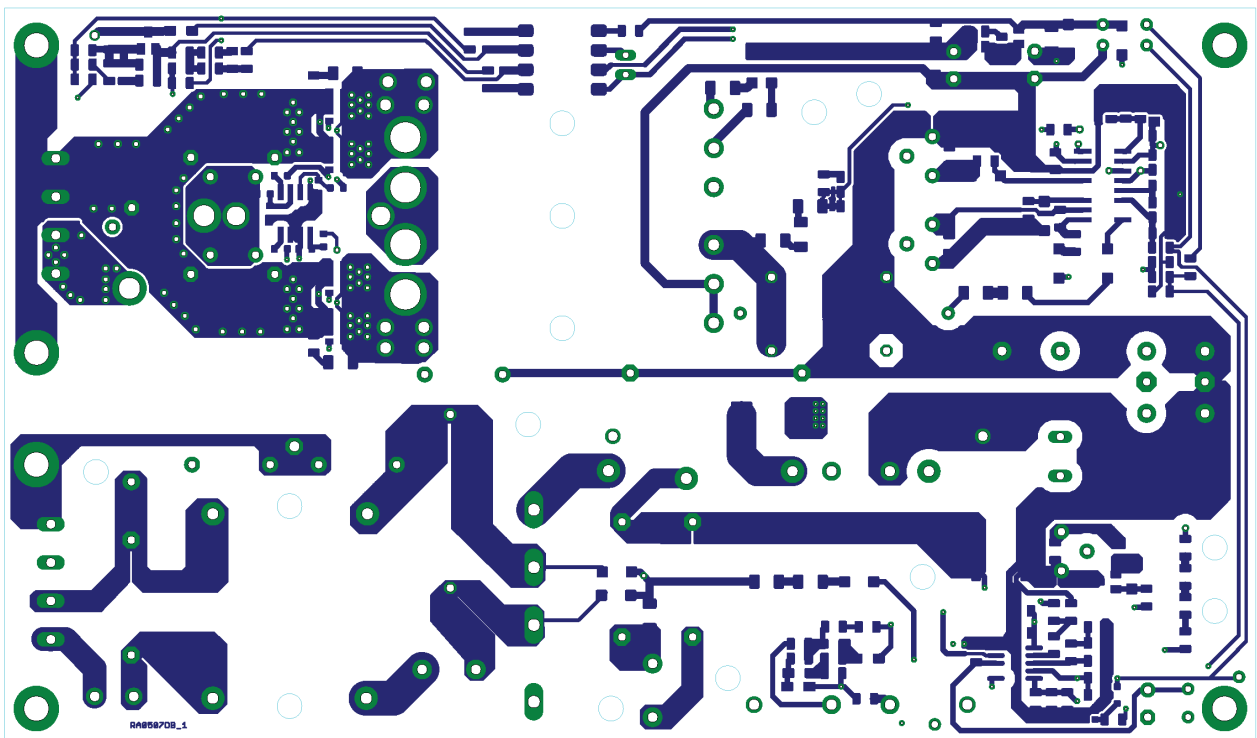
Evaluation Board – PCB Design of Bottom Layer
